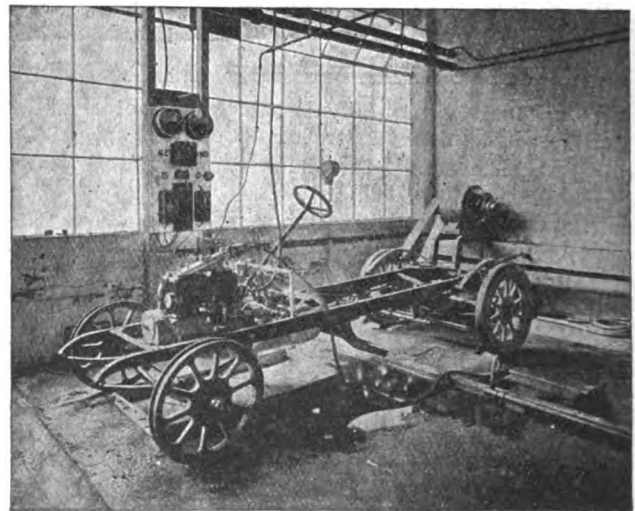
ELECTRICAL TESTING OF CHASSIS.
